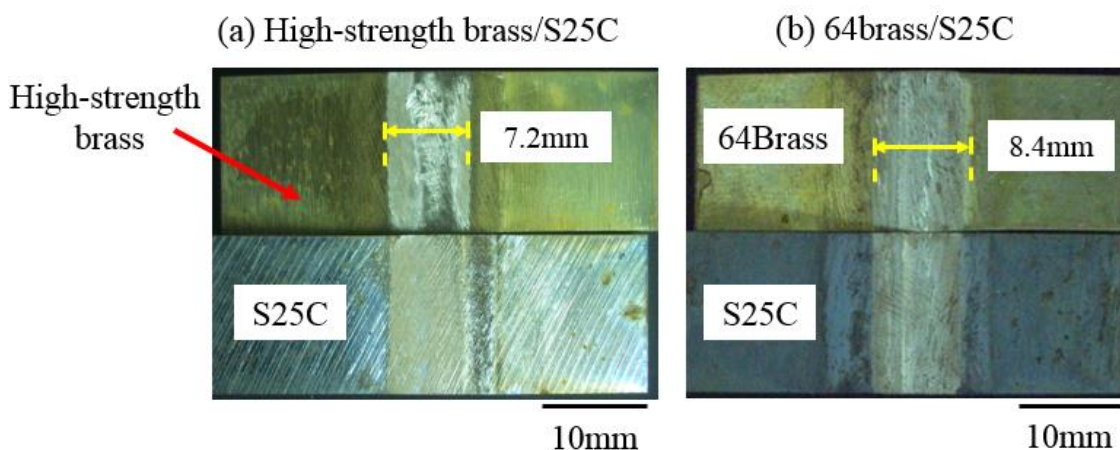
Fracture surfaces of the lap joints which welded with same tool with SD 15 mm and PD 10 mm, but different tool rotation speeds of high-strength brass/S25C:1250 rpm; 64Brass/S25C:1000 rpm at a same welding speed of 500 mm/min.
